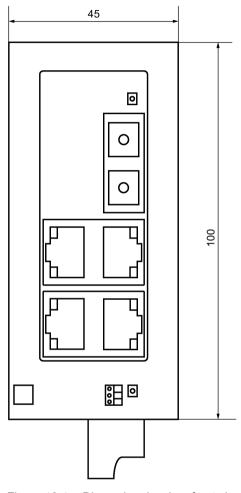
Dimension drawing, front view (example: SCALANCE XB004-1)
